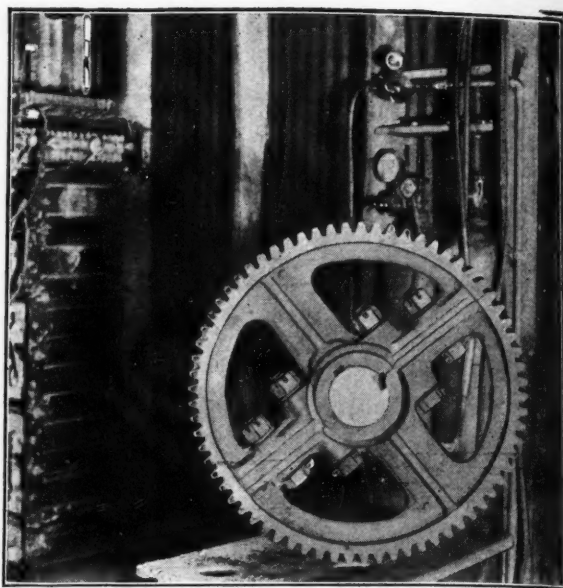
WELDING SPLIT GEAR OF LOCOMOTIVE
